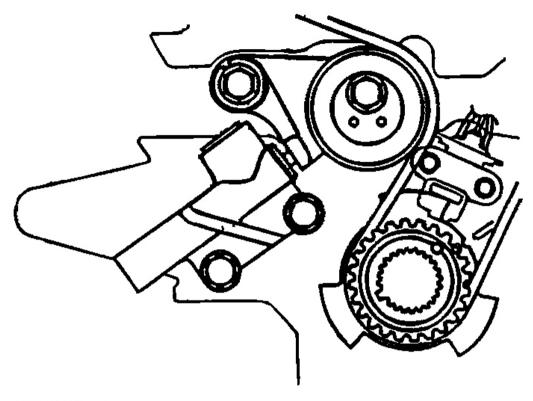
Removing The Auto Tensioner Courtesy of KIA MOTORS AMERICA, INC.
